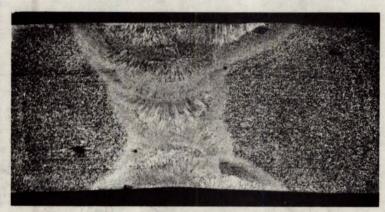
From weld specimen MR2. Metal-arc process, E7016 electrode, flat position.
